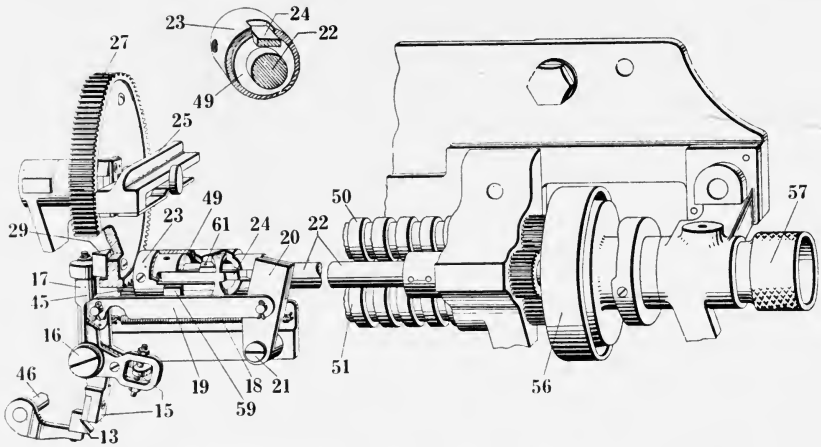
View of the Distributor Box Clutch in Action. The spool 23 is broken away to show the means of engagement of the clutch driver 49 with the pawl 24. In the small detail of the clutch, 23 is the spool, 24 is the pawl or butterfly, 22 is the distributor box clutch driving shaft, and 49 is the clutch driver pinned to shaft 22. As will be noticed, the clutch driver is eccentrically shaped so that the driving point will have a positive engagement with the lug of pawl 24. As the large shifter gear 27 is making one-half a revolution to change the distributor box from one distributor to the other, the spring 18 holds the cam lever 17 at the side of the gear; at the same time the pawl lever 20 and stop block 59 are held through connection with the link 19 to the right and clear of the pawl 24. As the large shifter gear 27 comes to the end of its one-half turn, one of the two cams 29 engages the roller at the top of the cam lever 17, moving the pawl stop 59 and the pawl lever in the path of the pawl 24 so that as the spool revolves, the pawl lever 20 depresses the right lug of the pawl 24 and moves the left end out of engagement with the clutch driver 49 which then strikes the pawl stop 59.
